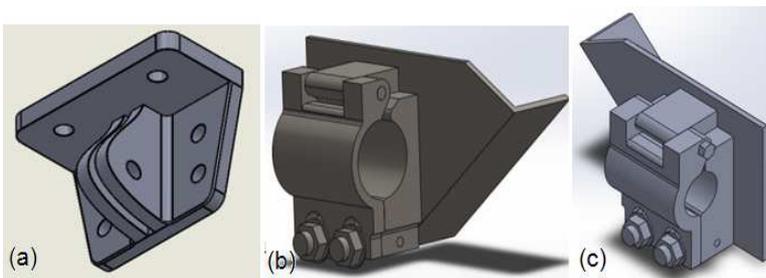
(a): Rear attachment point of Turbofan Engine; (b): Top left attachment point; (c): Top right attachment point adapter assembly
